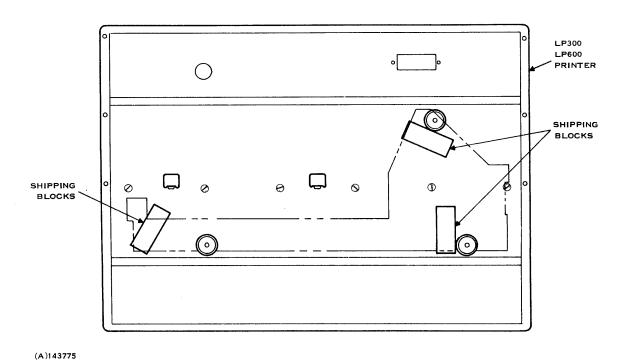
Preparing the Printer for Attachment to the Pedestal Stand
